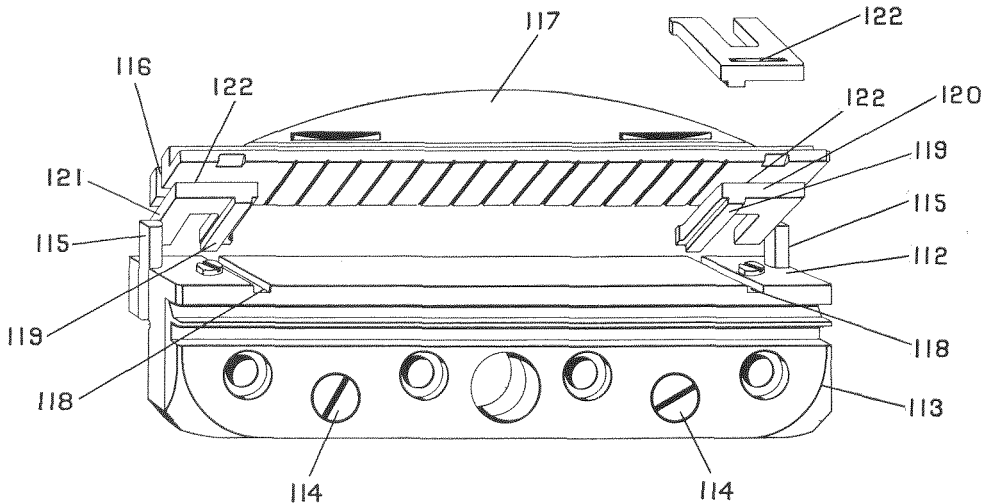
View of the mold. 112 is the mold body. On this mold body is a separate piece having a groove in it, 113, which is called "the keeper". The keeper is fastened to the mold by screws 114. The mold is fastened to the disk by four screws, the holes for which are shown. At each end of the mold body are two upright posts 115. These posts fit into two notches 116 at each end of the mold cap 117. The mold body has also in it two grooves from front to rear 118. These grooves are for the purpose of affording a seat to a projecting rib 119 upon the liners 120 and 121.
